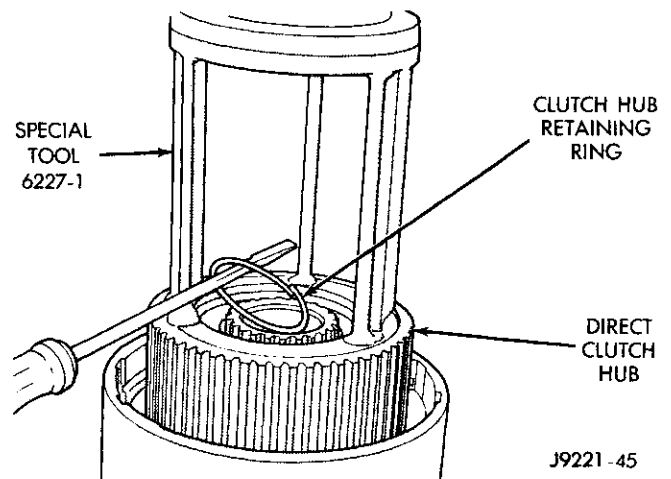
Removing Direct Clutch Hub Retaining Ring
